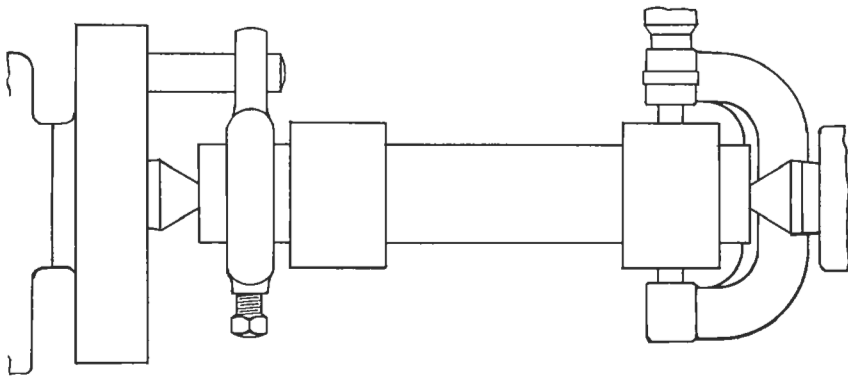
Test Bar for checking Alignment of Lathe Centres
